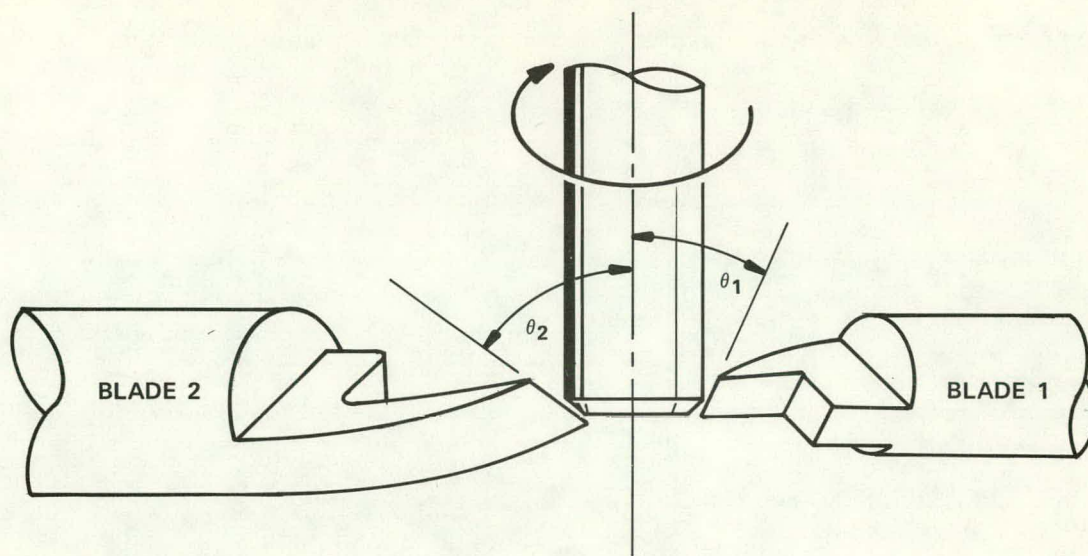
Two blades at different angles eliminate burrs at top and bottom of chamfer.
